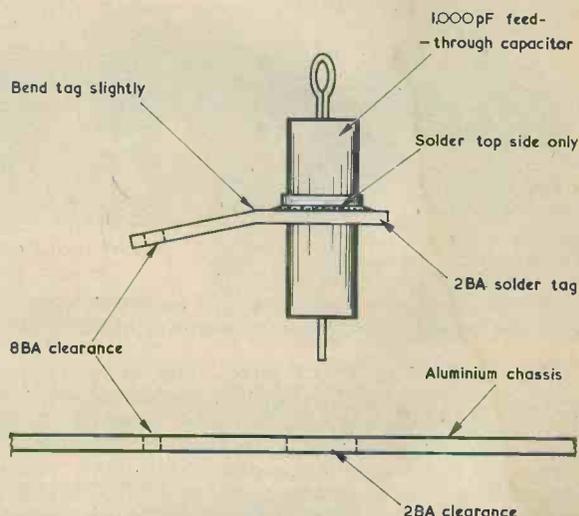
The feed-through capacitor is soldered to the tag before being mounted on the chassis
